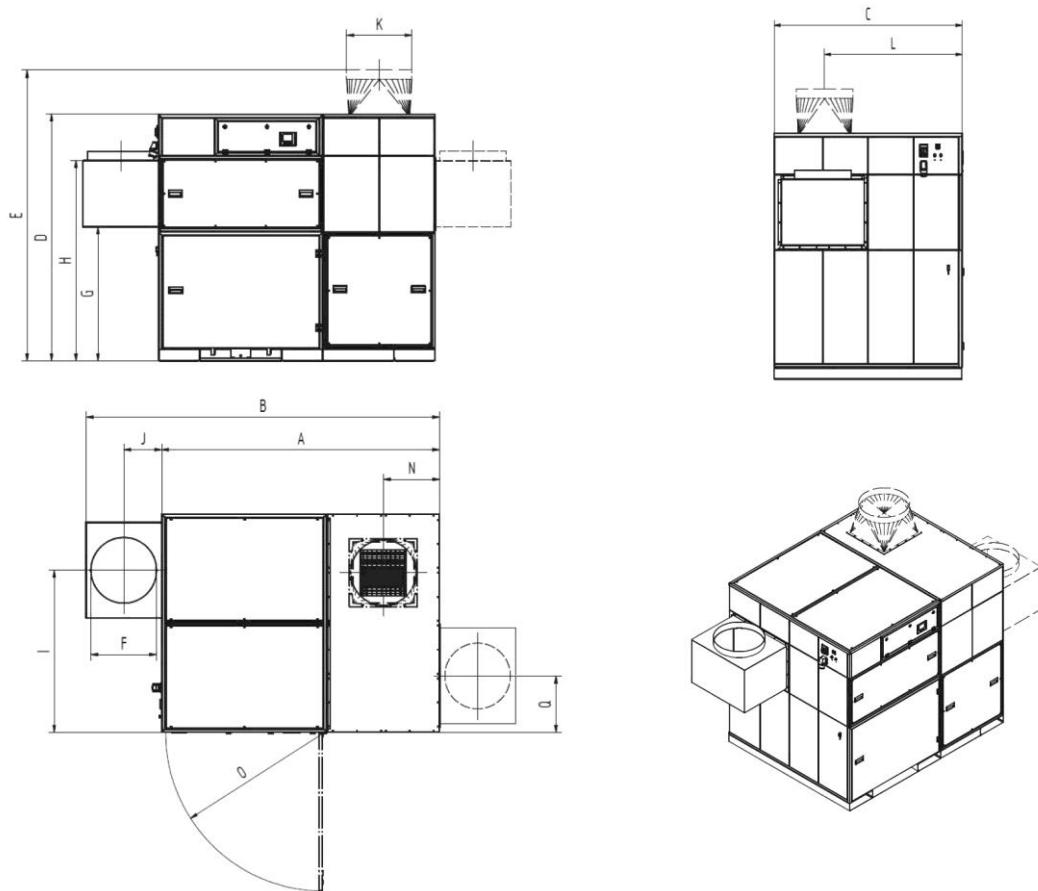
Dimension sheets 998701371 (998800401, 998800462)
